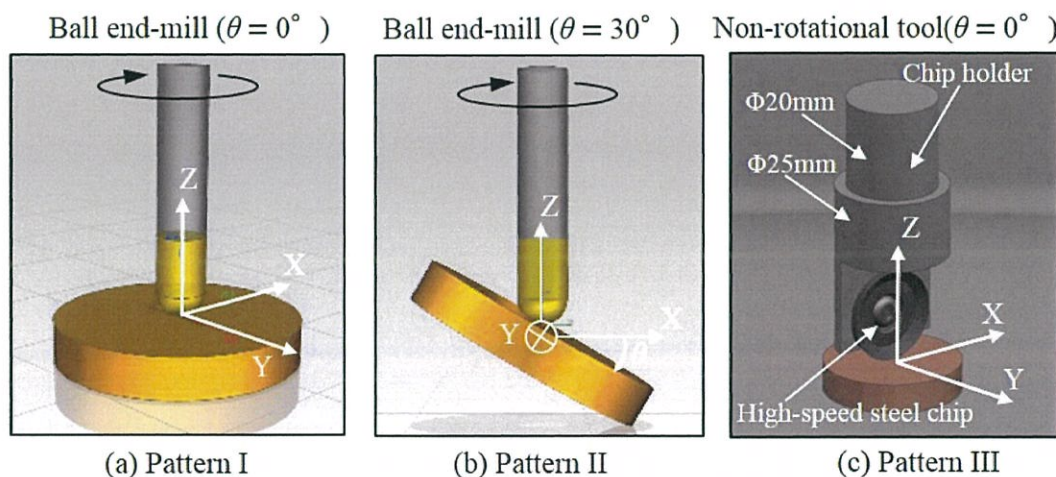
Creating pattern by ball end-mill and Non rotational tool
